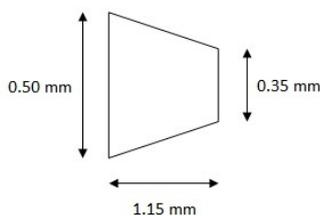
GALVANISED IRON KNIFE : MEASUREMENTS OF THE CUTTING EDGE
